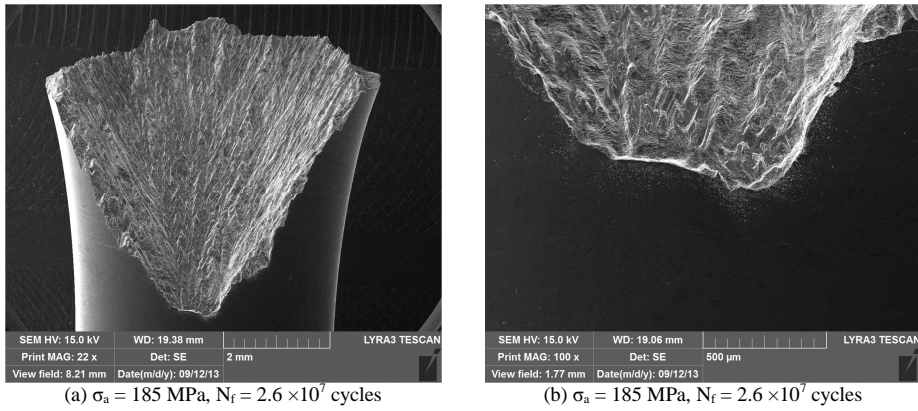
Fracture surface of NP specimen in macro view (a) and detail of the area under the crack initiation site (b).
